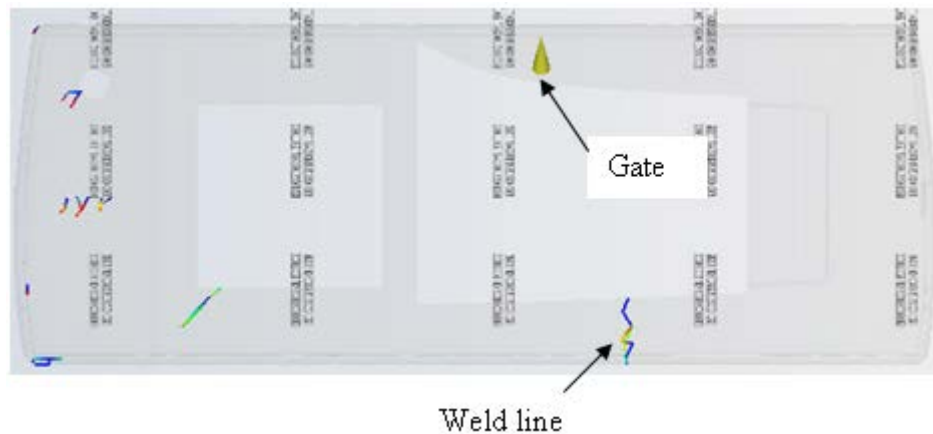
Weld lines produced by one injection gate at location A
